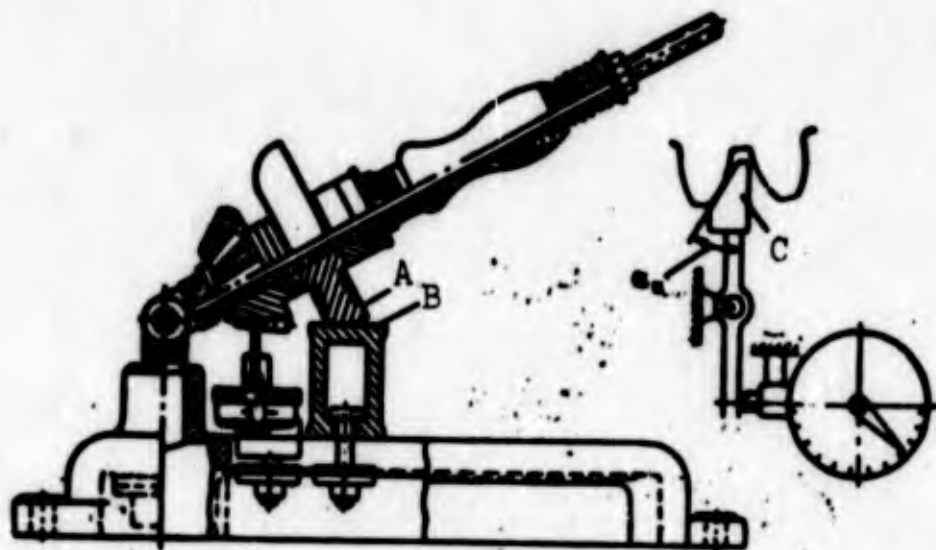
Diagram for checking the tooth profile of a bevel gear.
